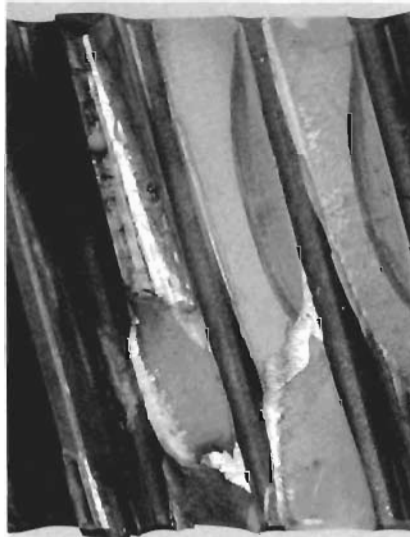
Helical gear, 1.12 \times . Tooth bending fatigue followed by tooth bending impact. Origin is off-center of the tooth midpoint but is directly above the center of the web.
